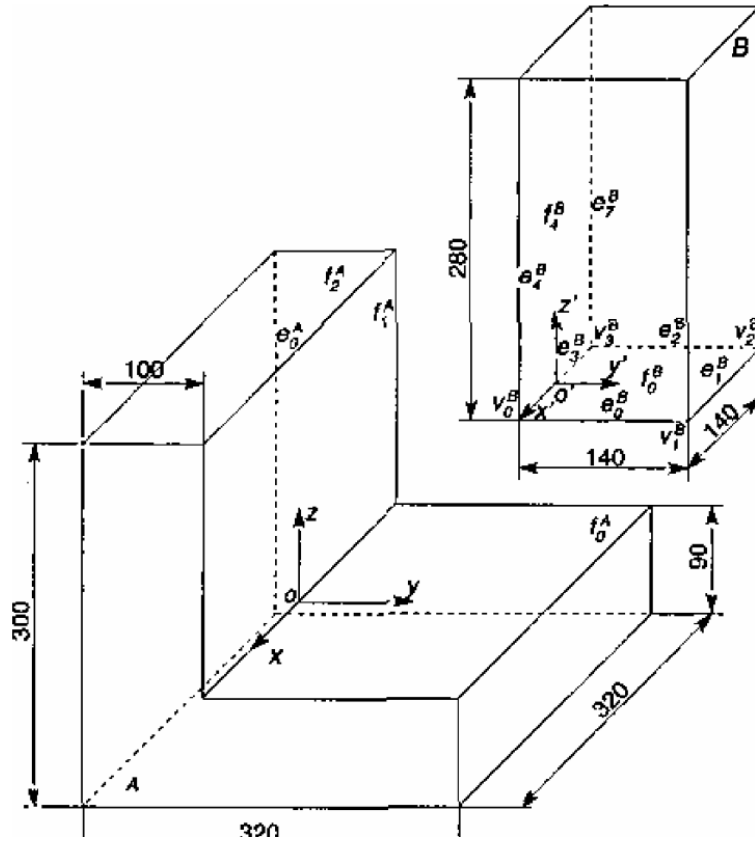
Example Assembly. Proper assembly is achieved when the coordinate frames are coincident. To avoid clutter, only those surface elements that can be contacted during assembly are labeled.
